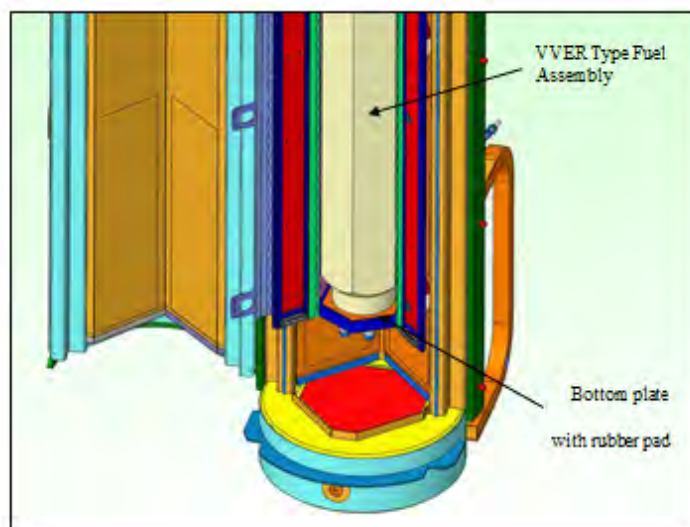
VVER Fuel Assembly Installed - Bottom Nozzle Region
